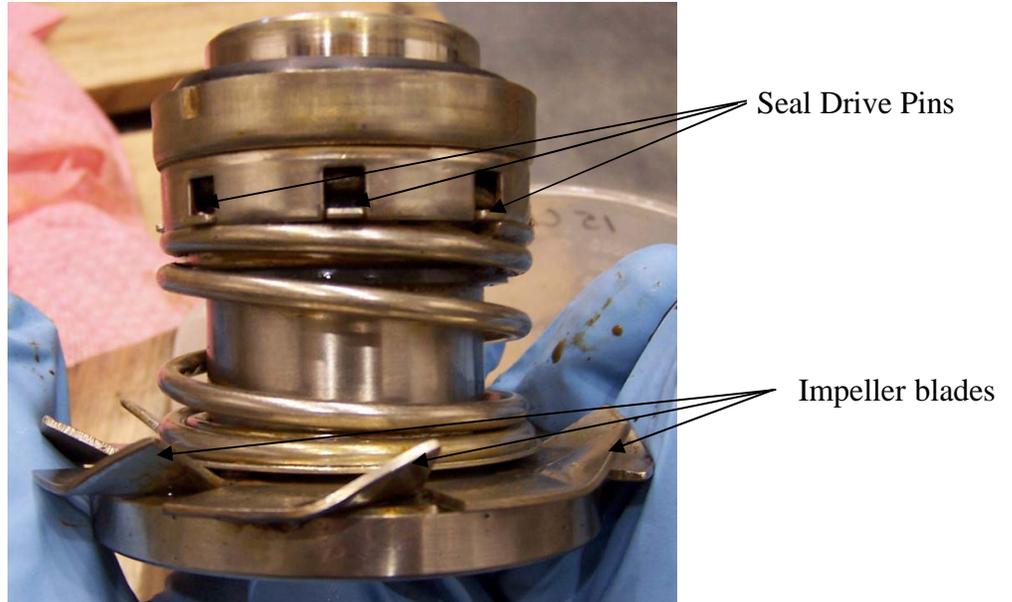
Shaft Seal Drive Mechanism after 120 Hours of Testing
